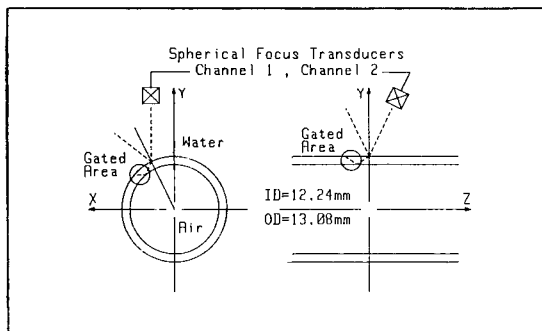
Alignment Between Tube and Transducers for Detecting Longitudinal and Circumferential Defects in a Cladding Tube.
